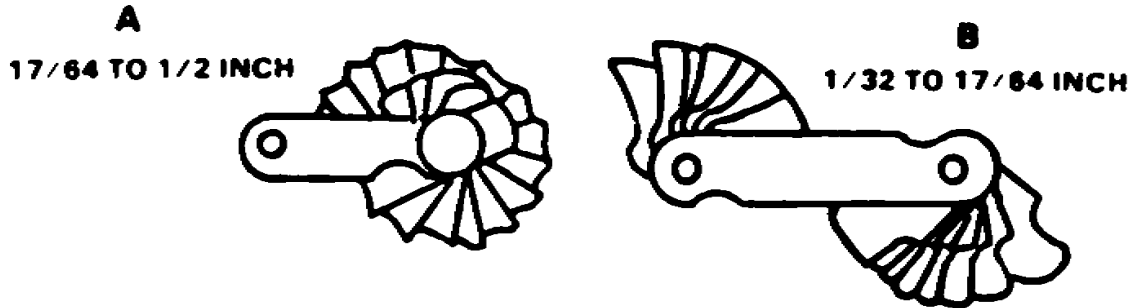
FILLET AND RADIUS GAGES (PARTS A AND B)
